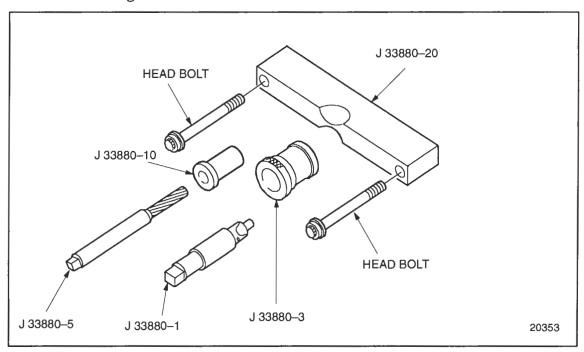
Injector Tube Installation, Removal and Refinishing
